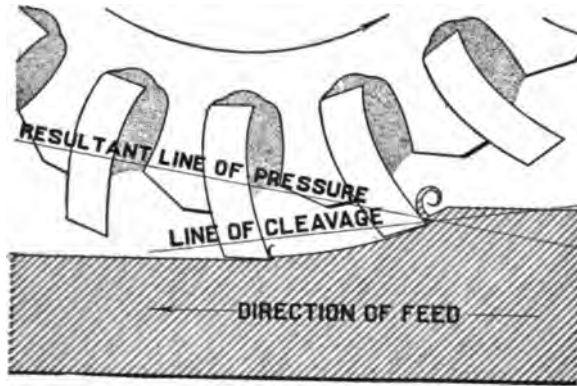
How the chip is removed — milling. Cutting edge of blade not under heavy pressure. Courtesy of Tabor Manufacturing Company.
